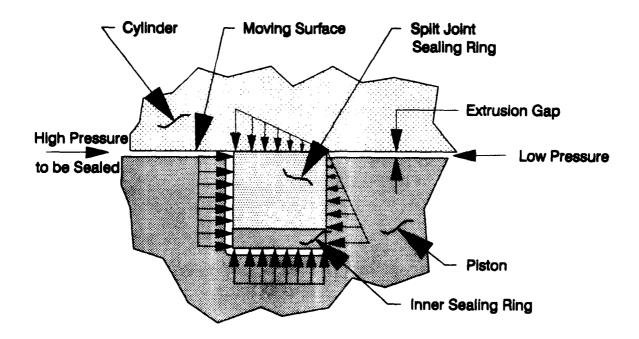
HYDRAULIC FORCES ON TWO-PIECE SEAL RING
